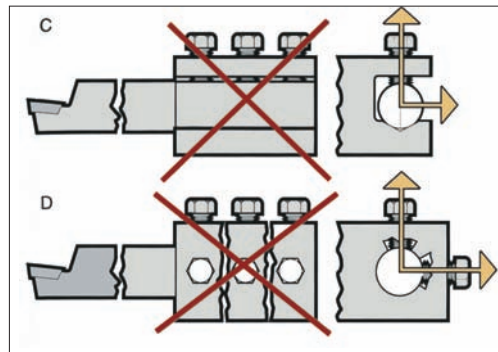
Toolholders that incorporate setscrews don't clamp the boring bar as securely as flange-mounted and divided-block styles.
